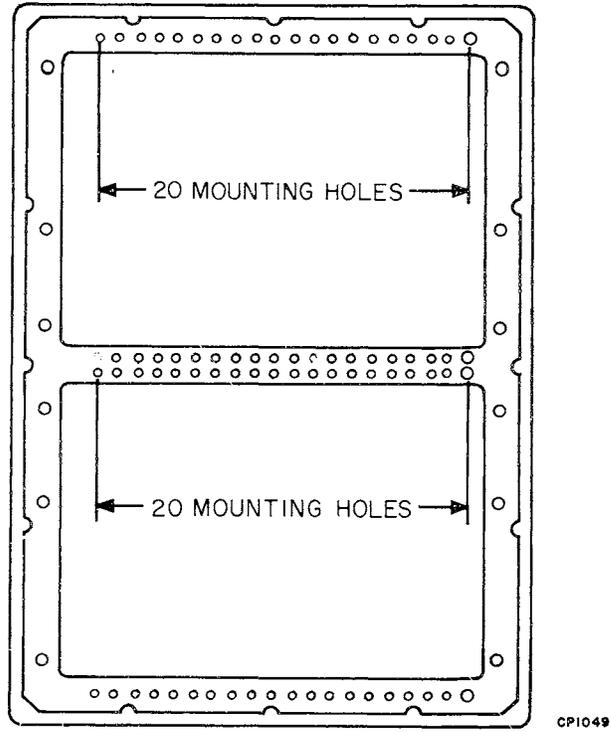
6-Line Key System, Mounting Hole Arrangement.
